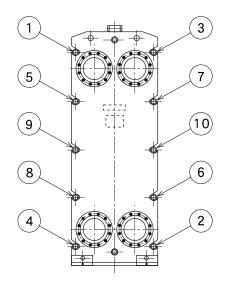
Tightening Bolt Nuts Unscrewing Sequence
